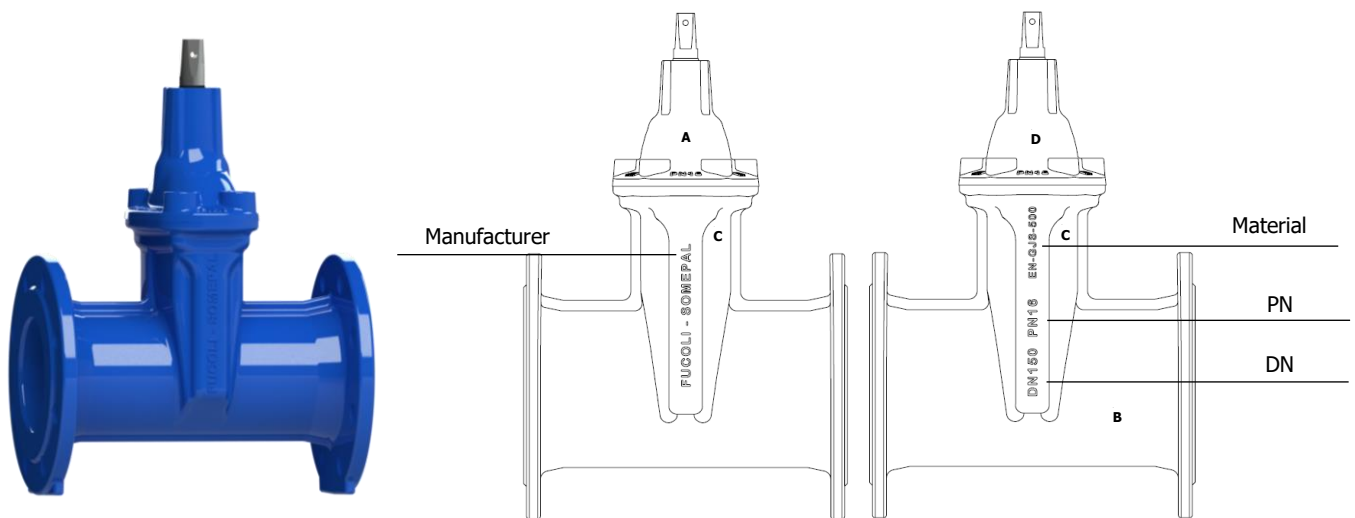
Flanged soft sealing gate valve S15 Nexus [ref. 01.210]
